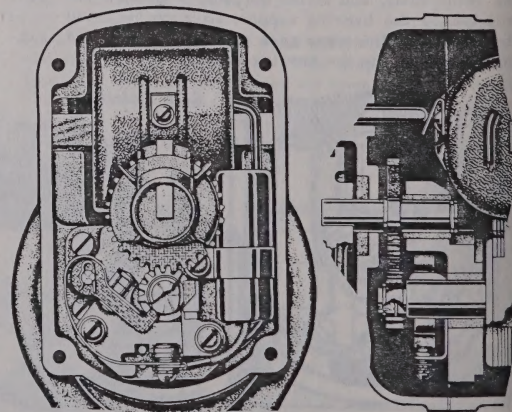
Bearing Support with Distributor Gear Assembly and Distributor Rotor
